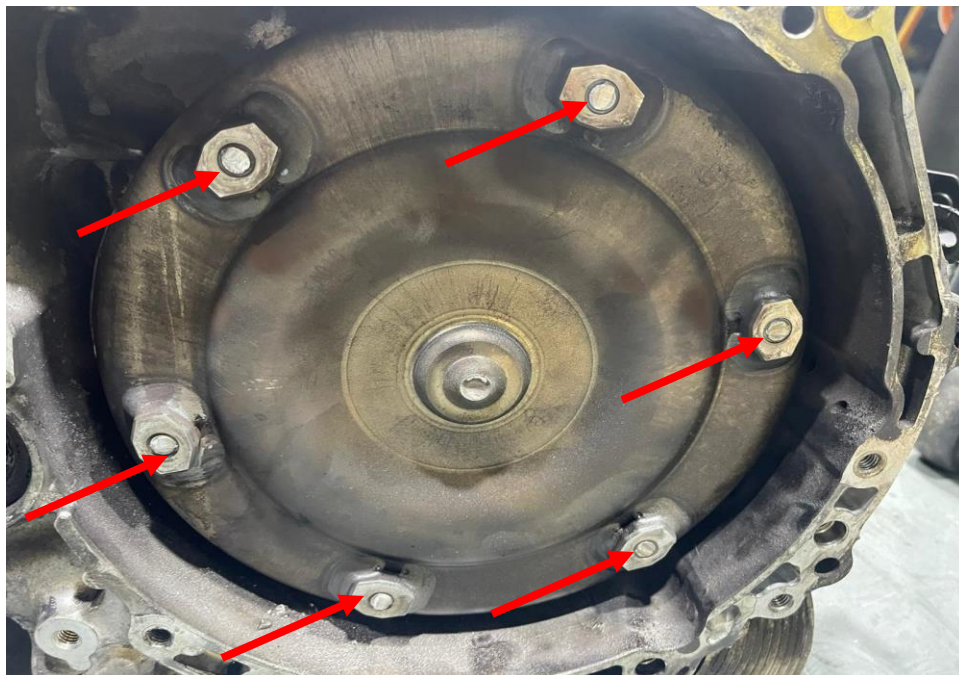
shows the close up view of the gearbox converter unit of the Insured Vehicle at the time of our inspection. The gearbox converter unit (arrowed) was observed to have sustained damages on it due to the free play of the engine flywheel.
